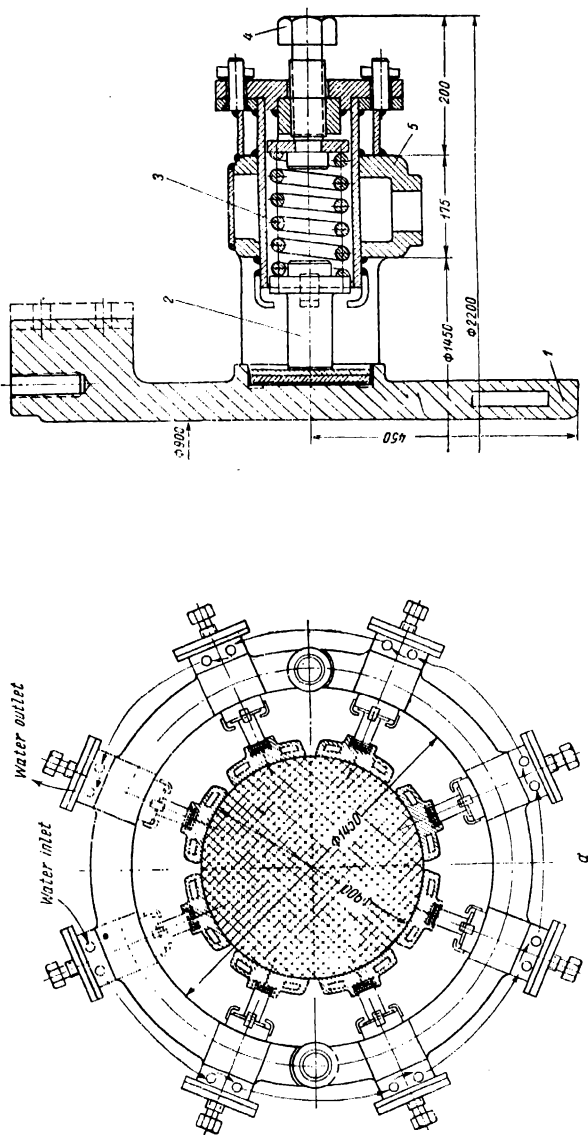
Spring clamping device, designed by Chelyabinsk Ferroalloy Smelter for a 900-mm electrode:
